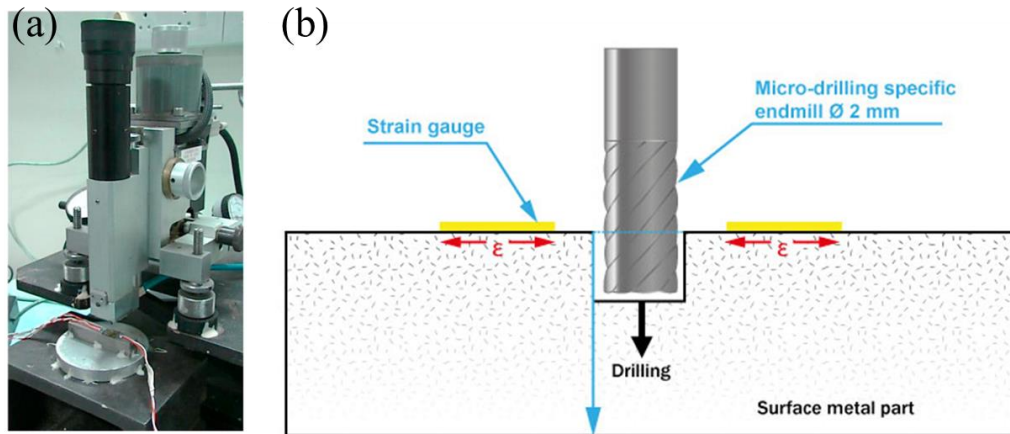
Hole drilling technique for RS measurement: a) The typical setup of the hole drilling method [259] and b) Schematic of principle of hole drilling method [260].
